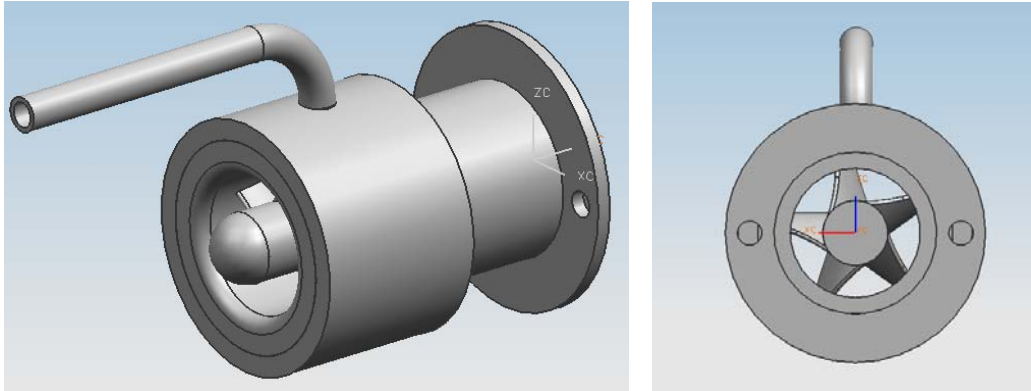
3-D CAD models of the premixer: (left) isometric view (right) downstream exit view
